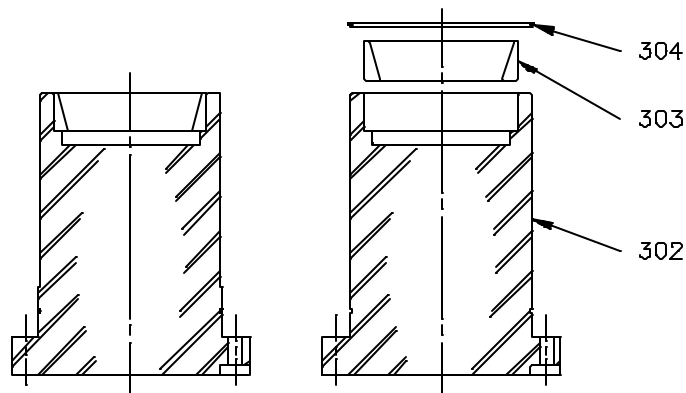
Lower Pinion Shaft Bearing Cap Assembly [301]
